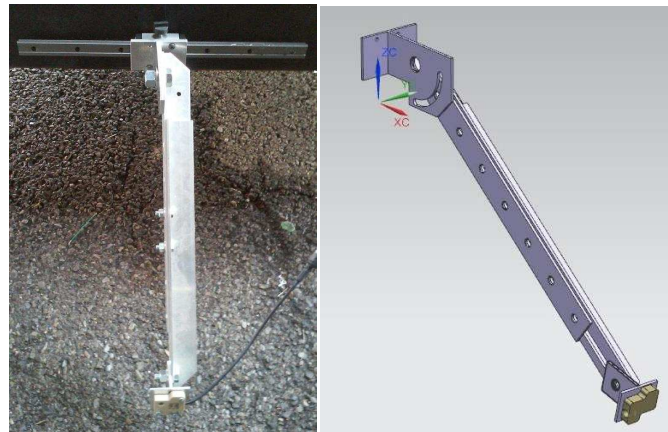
Adjustable fixture for measuring the temperature at the tread of the rolling tire finally glued it onto the rim surface. A fixture is design to mount the IR sensors outside the tire as shown in Figure 8.15, by adjusting the fixture arms it can be adapted for larger and small diameter tires. Using, the measurements from IR sensors the heat conducted from the tire tread component can be measured. Schematic of test apparatus with the mounted tire is shown in Figure 8.16.
